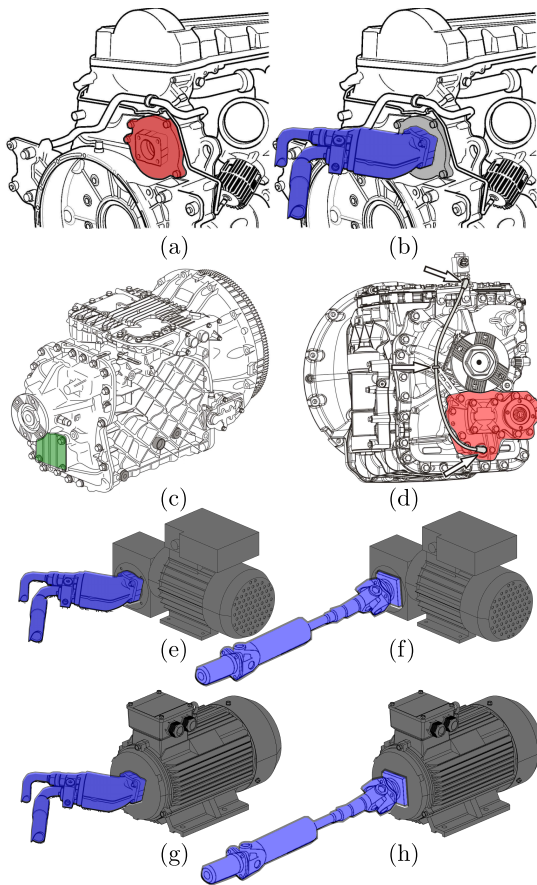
a) Diesel engine rear PTO mount; b) diesel engine with mounted hydraulic pump; c) Transmission with direct PTO mount; d) transmission with geared PTO [5]; geared ePTO propelling hydraulic pump e) and universal joint shaft f); direct ePTO propelling hydraulic pump g) and universal joint shaft h).
